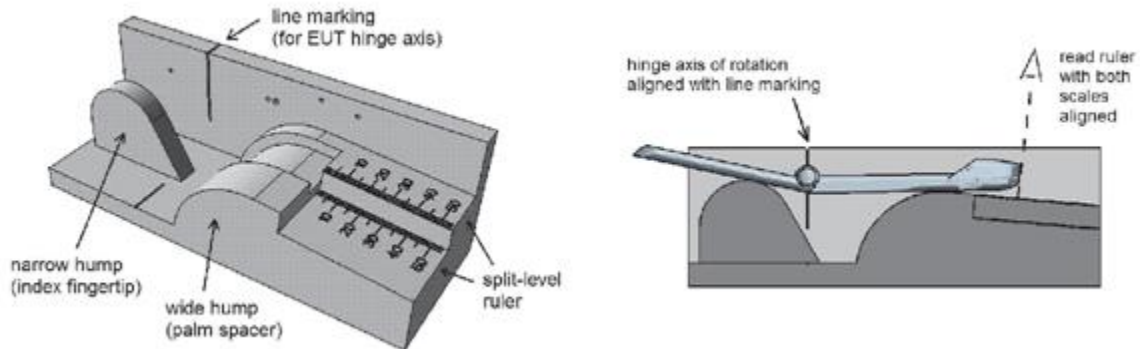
Alignment Tool B and Usage with Fold DUT
